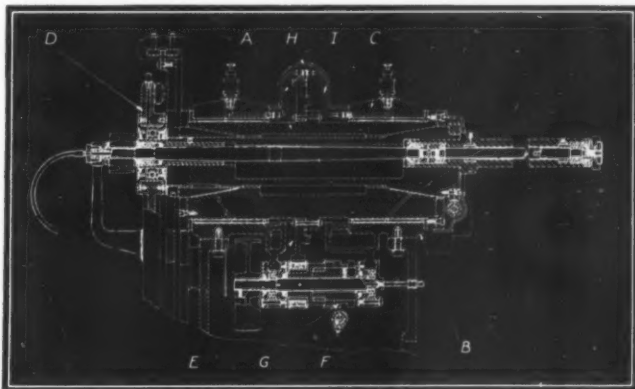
Eccentric cylinders permit an orbital movement of cutting tool while work is held stationary
